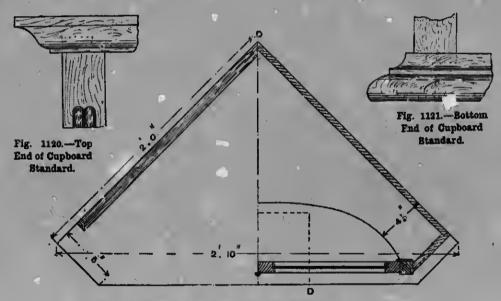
Horizontal Section through Hanging Corner Cupboard.
